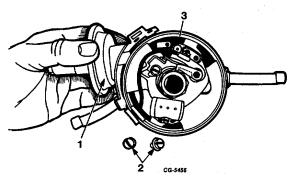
Removing Vacuum Advance Diaphragm Assembly
